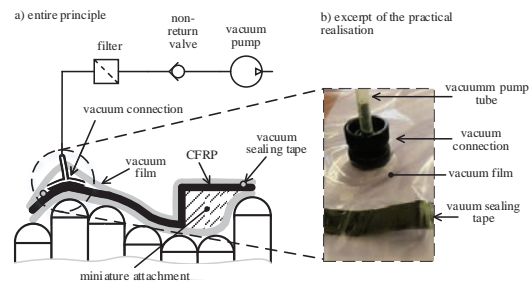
Attaching principle based on pressing a film over a laminating attachment and an IPL.
